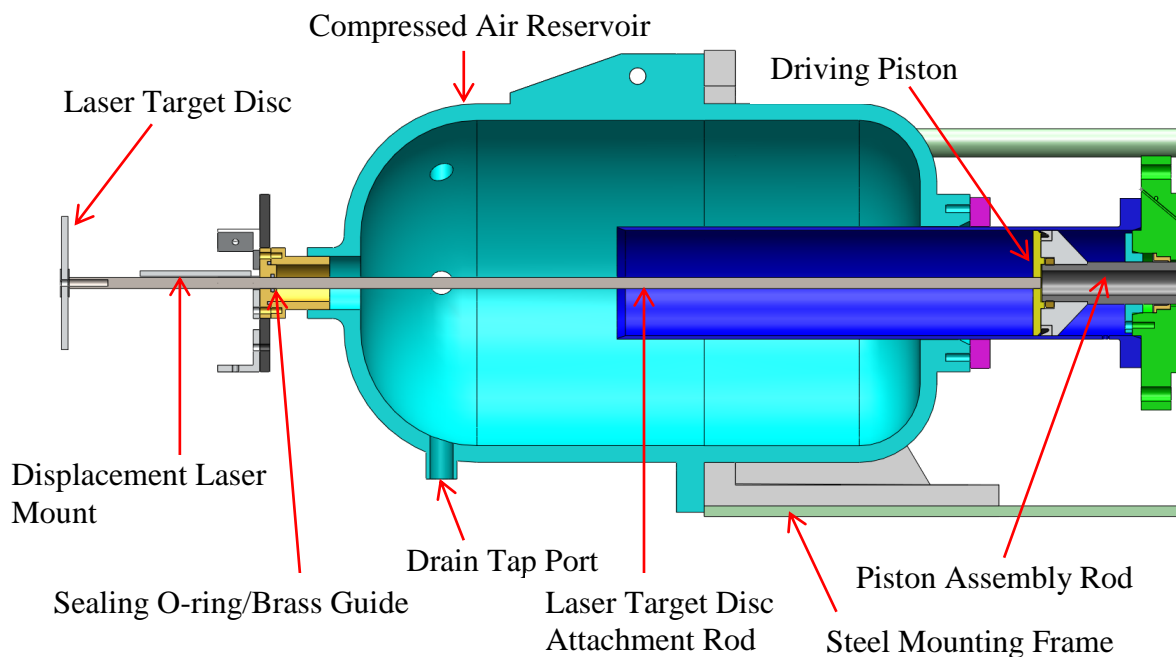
SolidWorks model cross section of section A: Pneumatic driving reservoir (Piston assembly at EOC).
